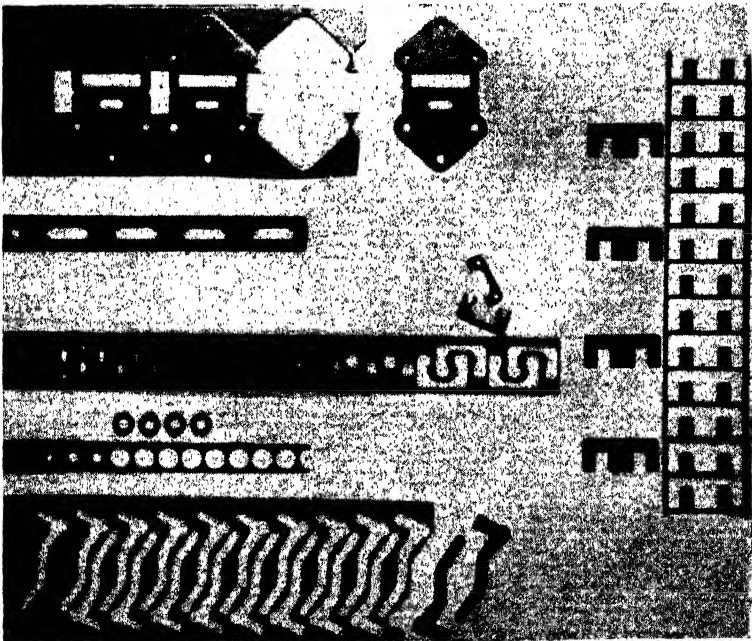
These parts are blanked from strip stock as the latter is fed through a die that shears the blank and leaves waste at the edges and between the holes punched in the strip.
